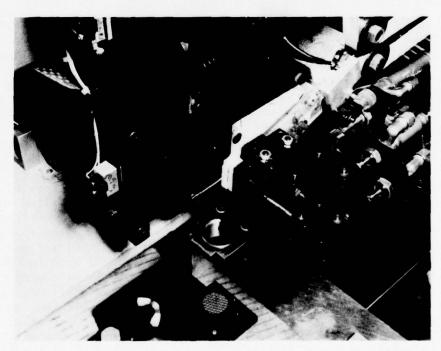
Insertion Head - Quill in Pickup Position (Front View)
